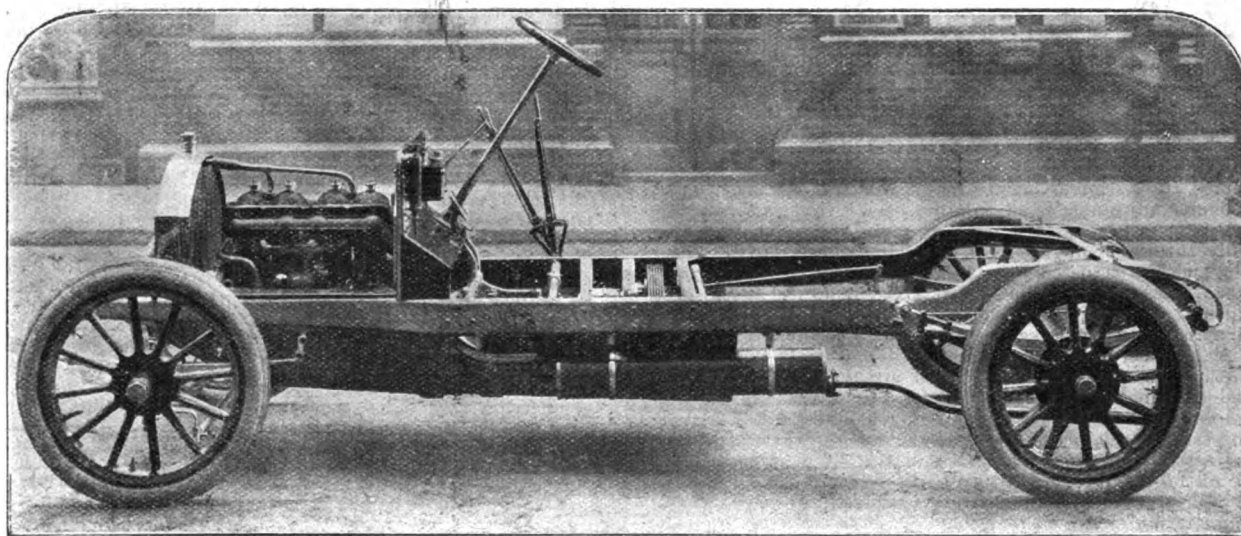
Chassis of Züst 18-24-h.p. Live Axle Car.
